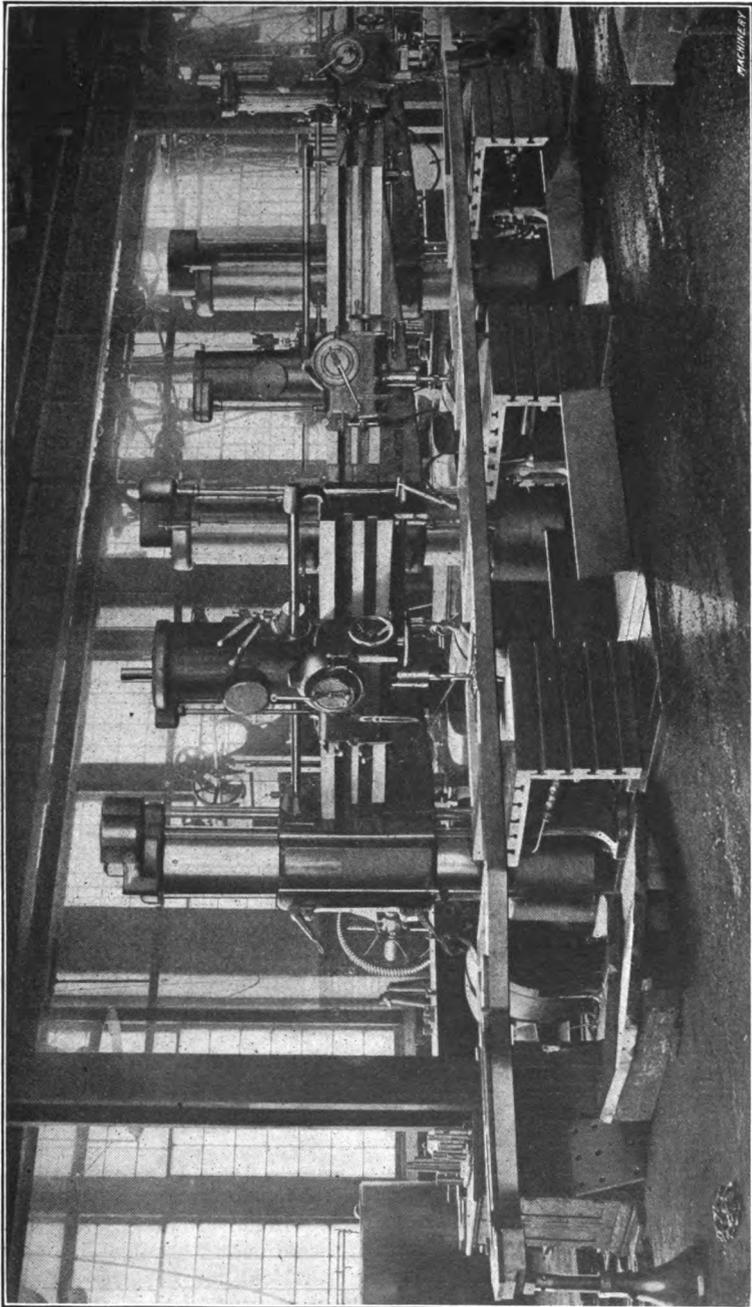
Gang of Three Radial Drilling Machines used for Locomotive Frame Work
